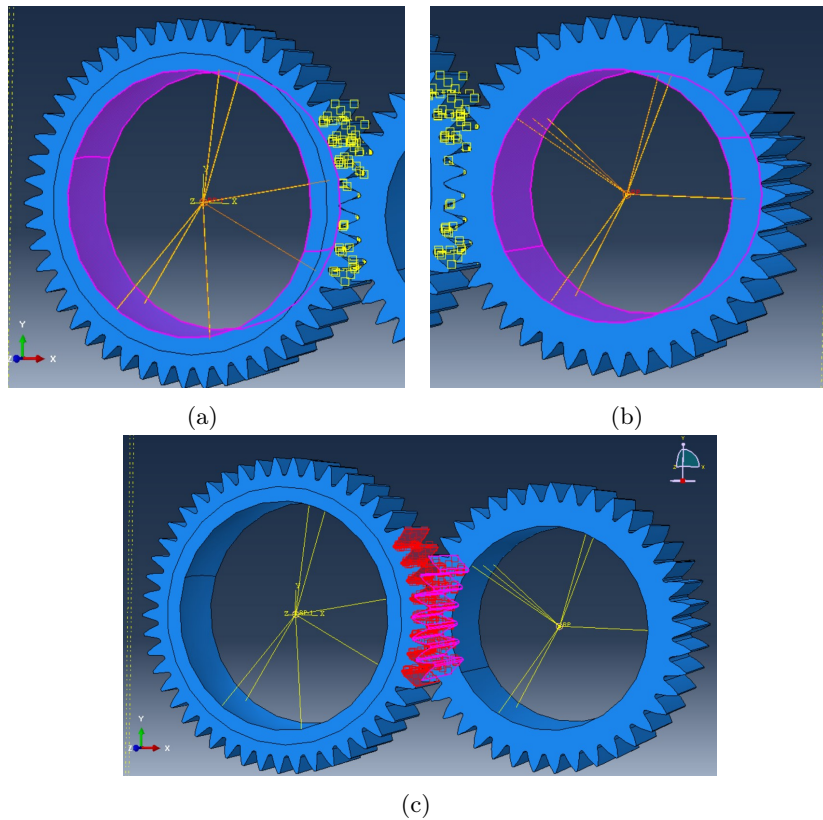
Boundary conditions on gear components: internal coupling for (a) planet gear and (b) sun gear, (c) contact at teeth
